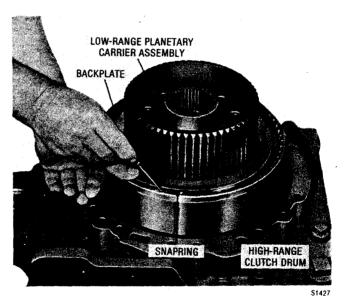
Removing high-range clutch backplate snapring (TRT 2221-3, 2421-3 with underdrive)
